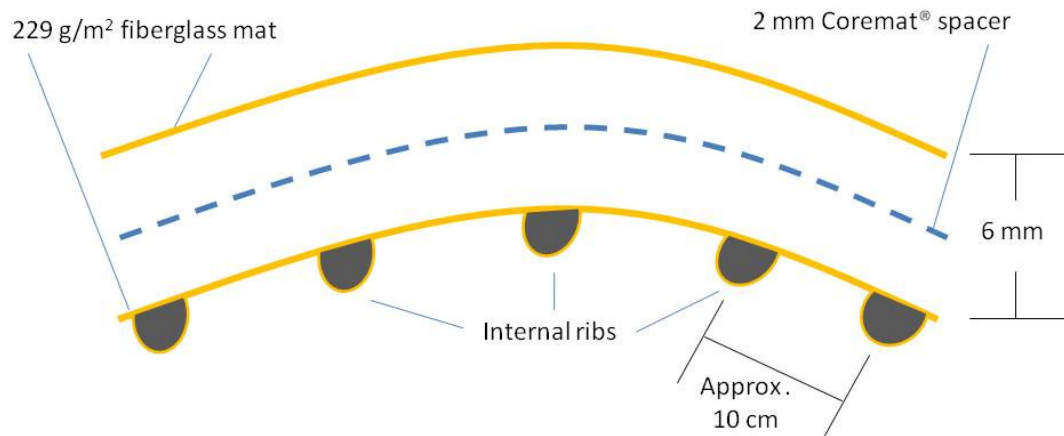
Cross section diagram of final carapace design with a 2 mm Coremat® spacer between two layers of 229 gram per square meter fiberglass mat and internal rib structure.
